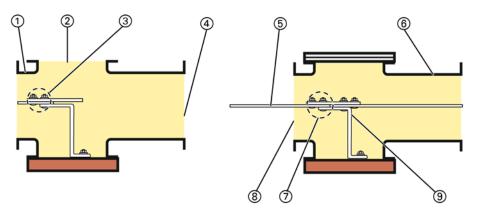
Re-assembling the busbars (example with elbow coupling)
